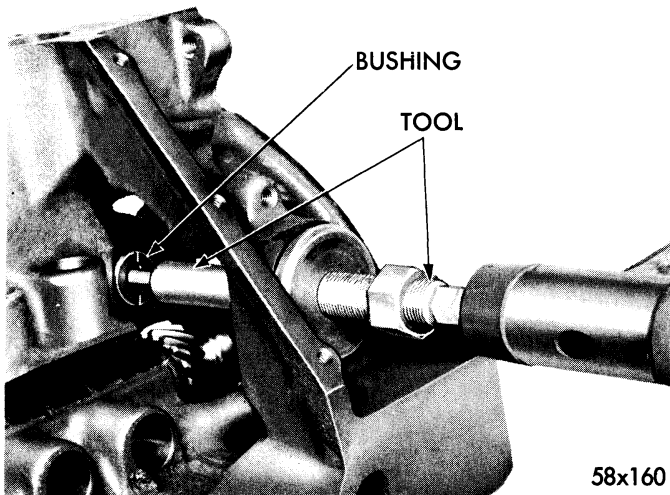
Installing Distributor Drive Shaft Bushing—350 Cubic Inch V-8 Engine
